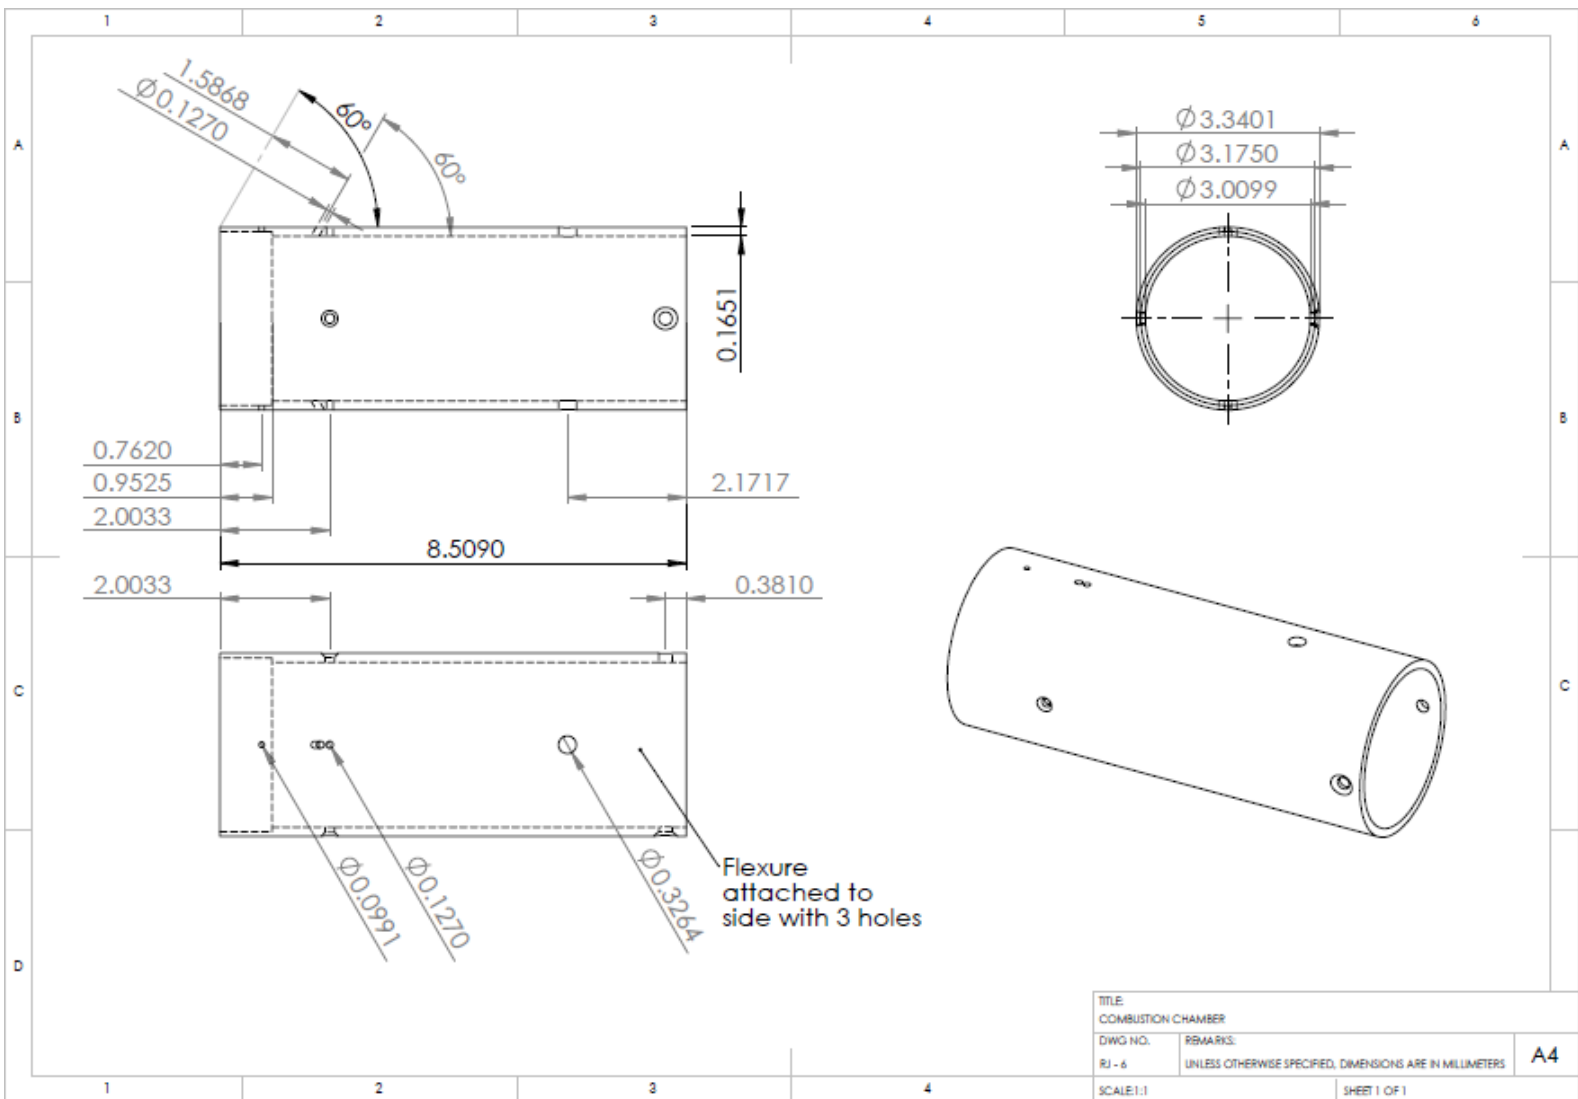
Part drawing: Ramjet combustion chamber (RJ – 6)
